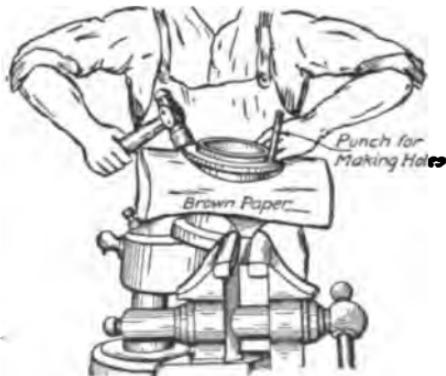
Cutting Gaskets on the Parts with a Hammer is the Best and Quickest Method
